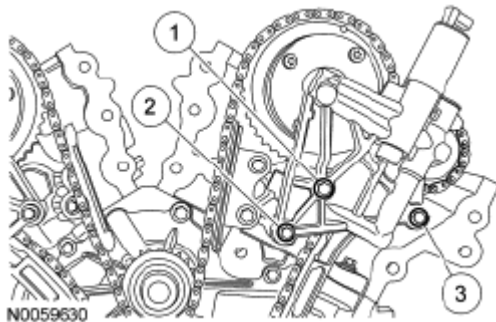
VCT Housing Bolts Tightening Sequence - LH
